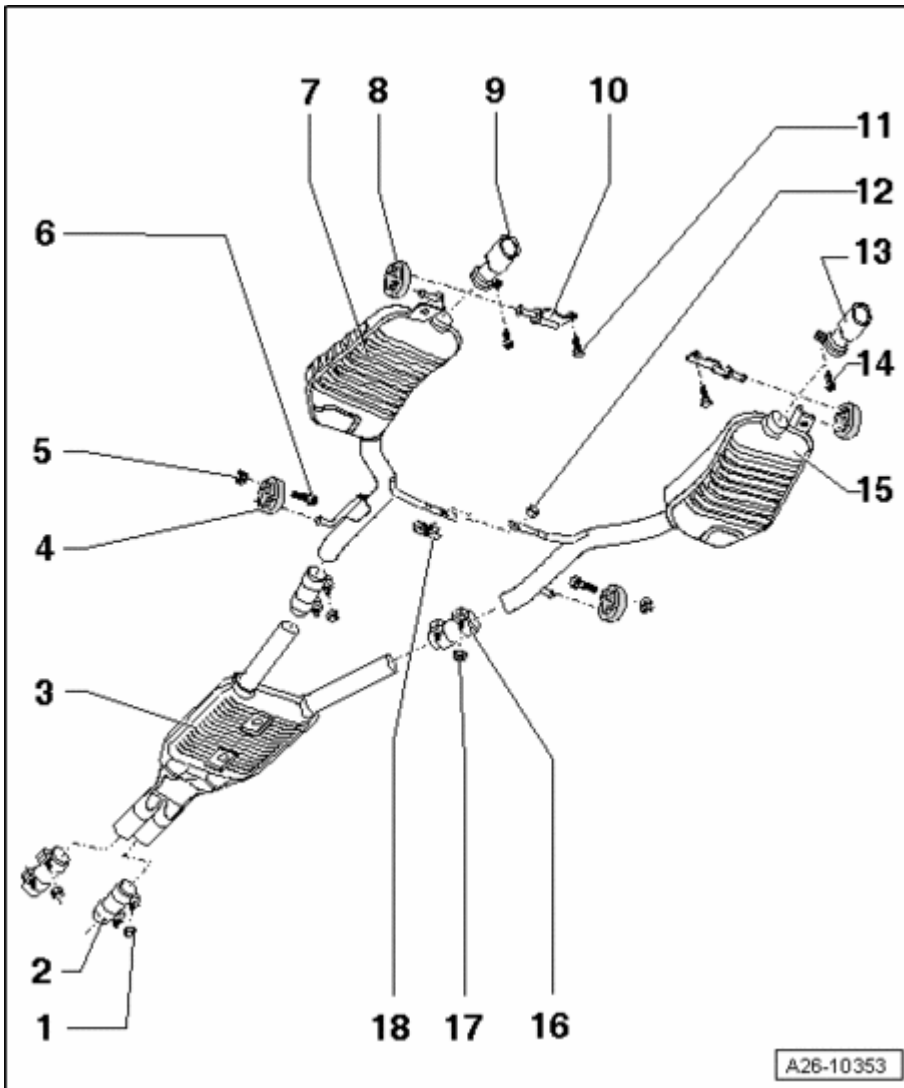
Exhaust System, Assembly Overview (Exhaust System, Rear)
